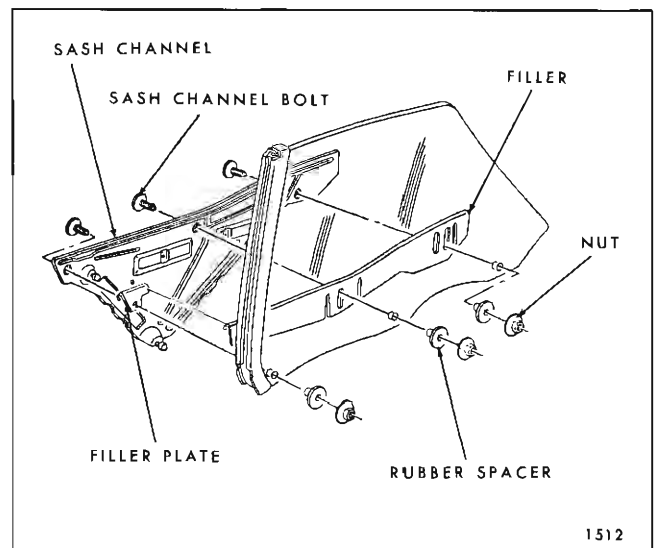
E22—Rear Quarter Window Assembly - "67" Style
